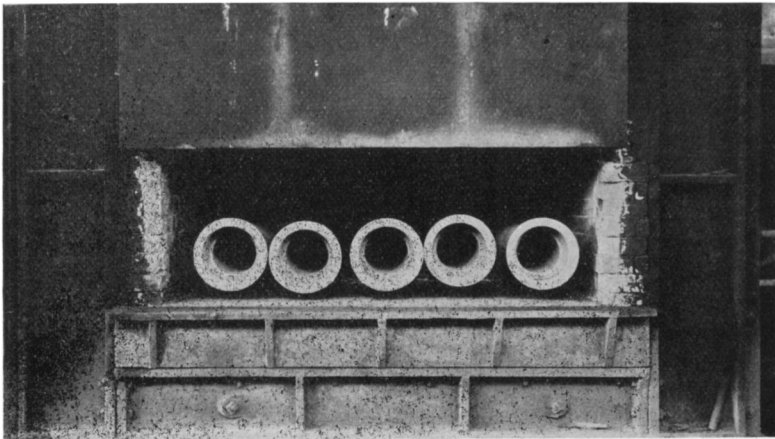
MACHINE-MADE PIPE IN ANNEALING FURNACE
